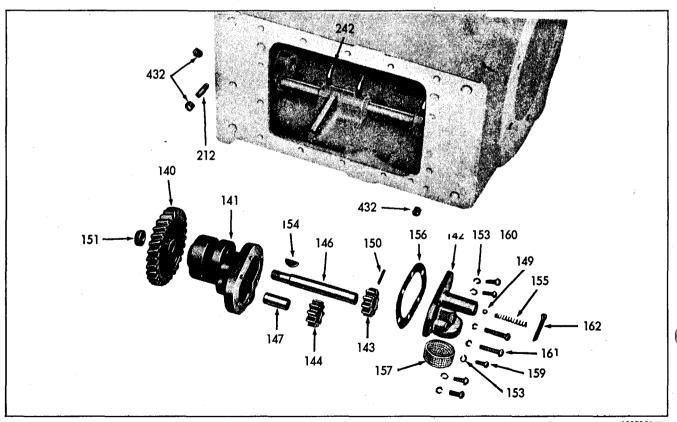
, Ref. No. 139, OIL PUMP ASSEMBLY
